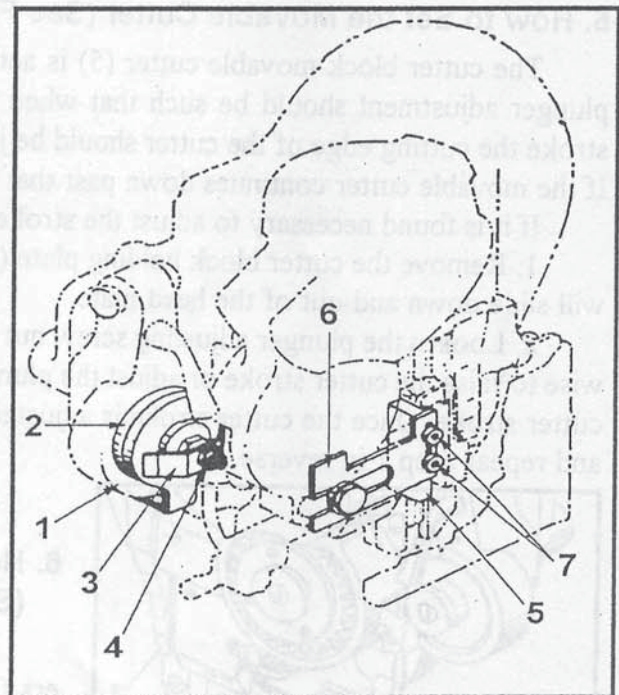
Wire Feed brake Tension and Wire Guide Adjustments (Long Draw Heads)
